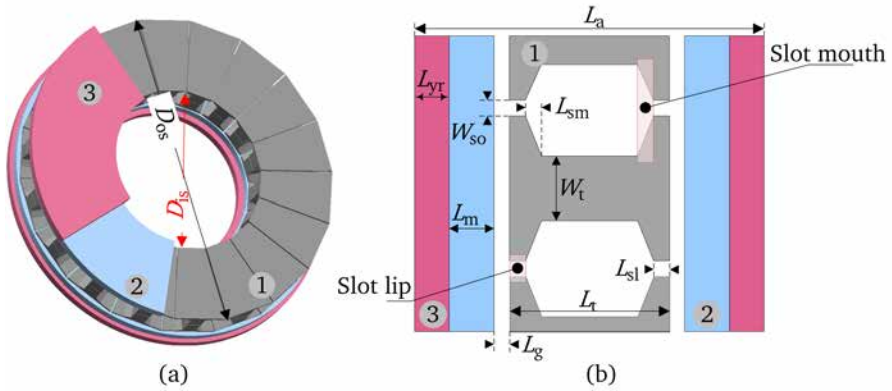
Variables defining the geometry of the SAT PMBLDC motor (1. segmented stator, 2. magnets and 3. rotor). (a) Cutaway model. (b) Sectional view of the inner periphery.
